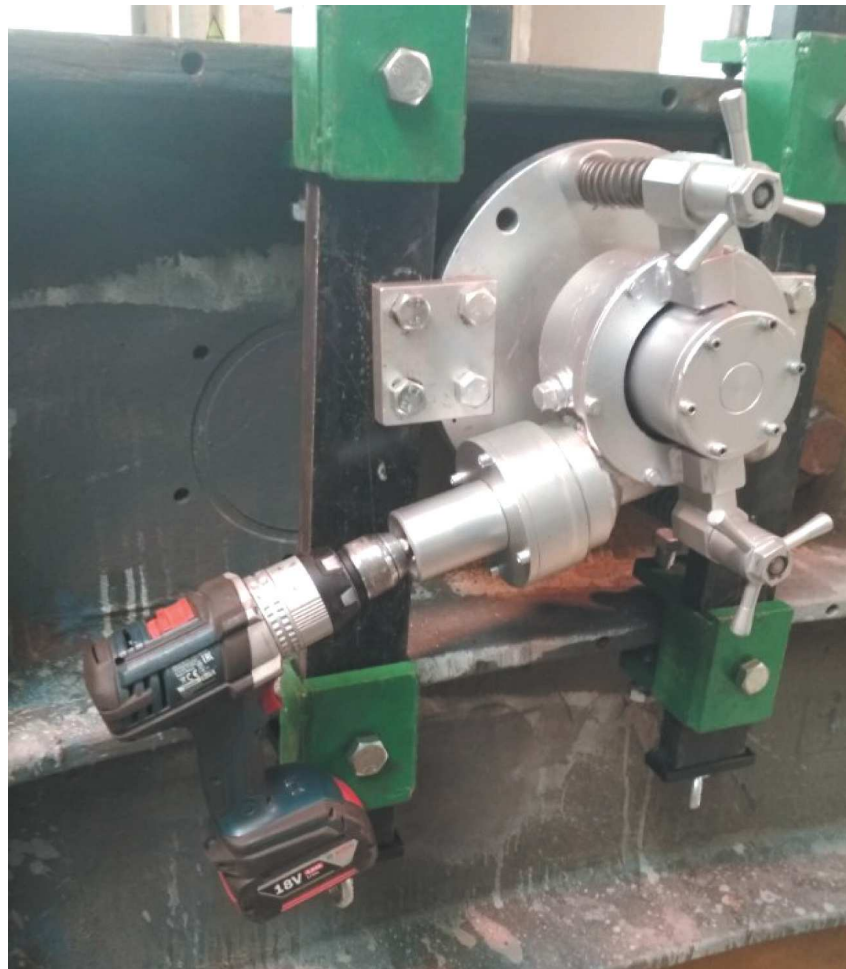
Milling machine mounted to tubing lining with drill-driver driving the system
